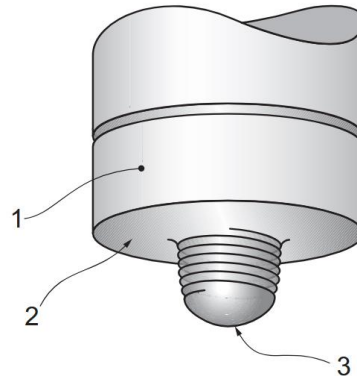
Example of a FSW tool. 1-Workpiece; 2-Shoulder; 3-Probe [2-13].
